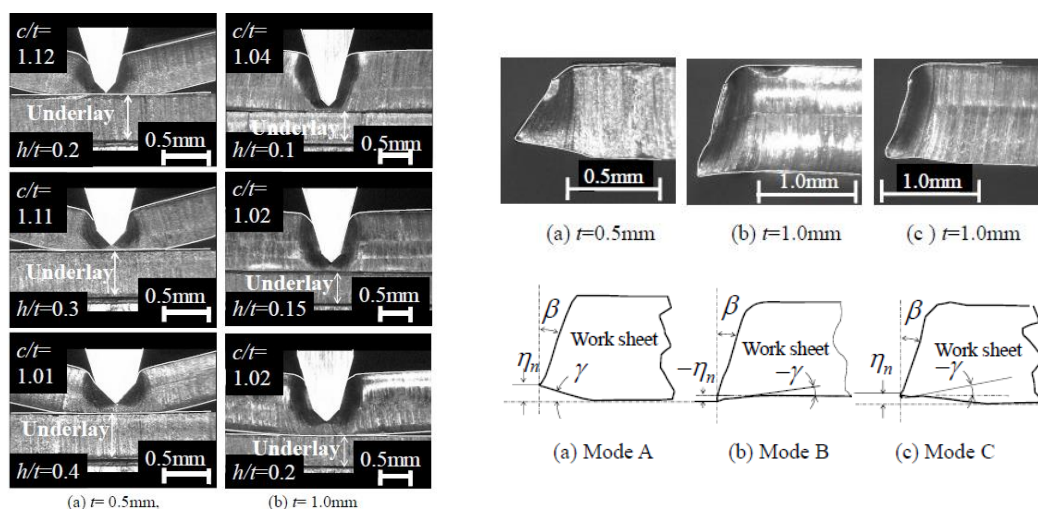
Cutting profiles of PC sheet [1-43].
